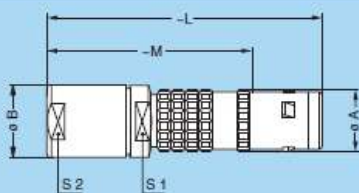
FIG Straight plug, key (G) or keys (A to F, L and R), cable collet and oversize cable collet ¹⁾
